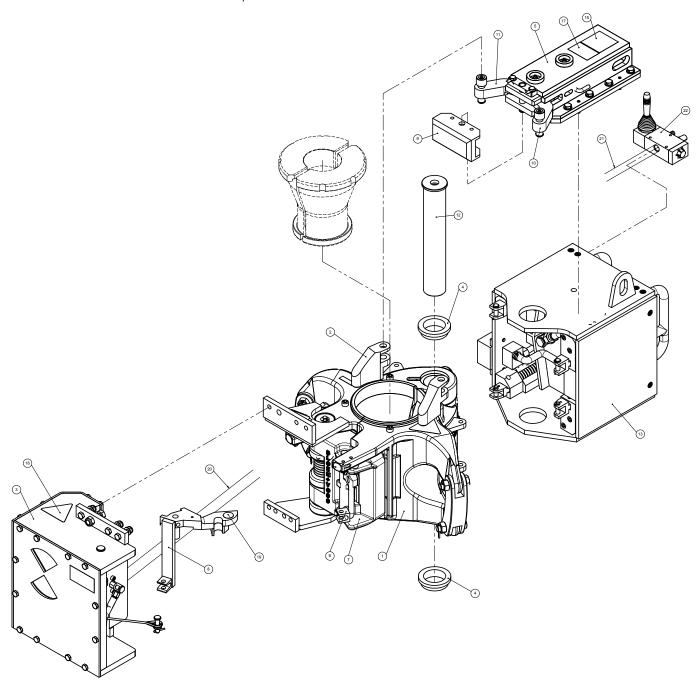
612970-Y VES-ACL 250 Elevator exploded View
